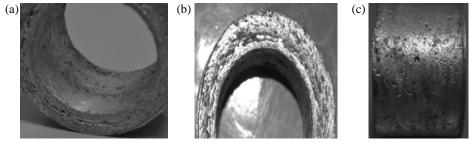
Physical properties of casting with temperature 725 °C. (a) Inner surface; (b) side surface; (c) outer surface
